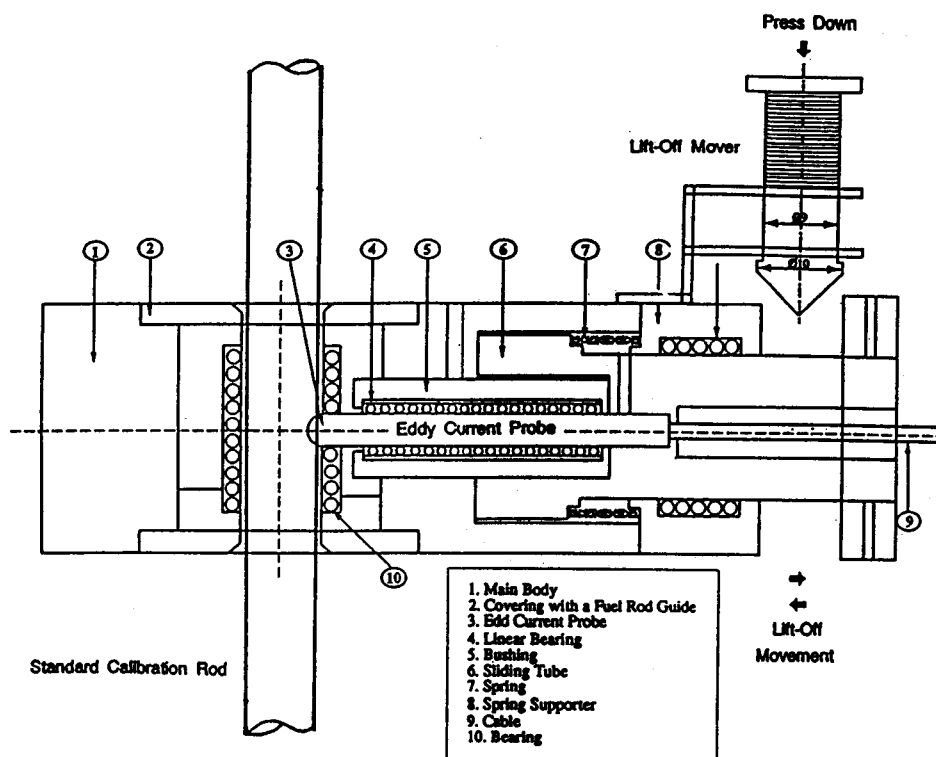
Schematic Drawing of the Oxide Layer Thickness Measuring Device Assembled with the Component Parts.
